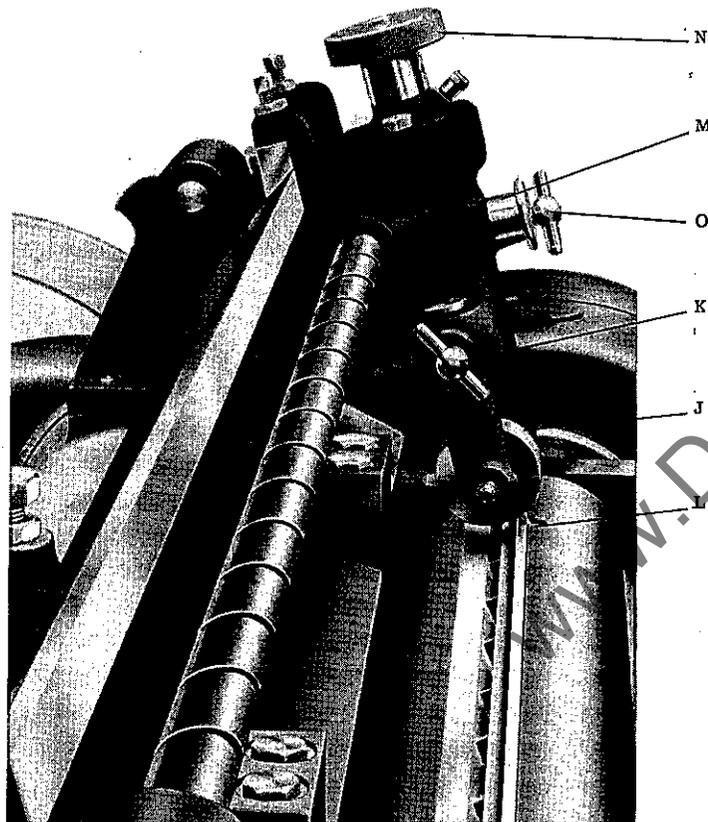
KNIFE SETTING AND JOINTING DEVICE
